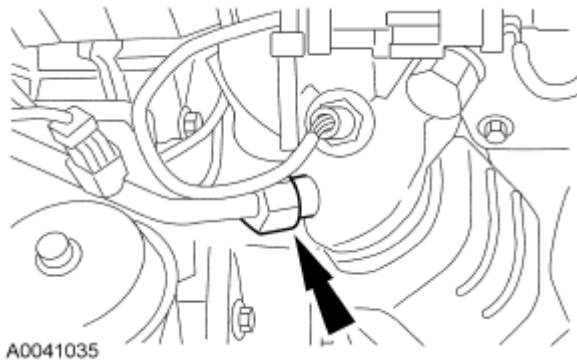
Locating EGR Tube-To-RH Catalytic Converter Fitting
